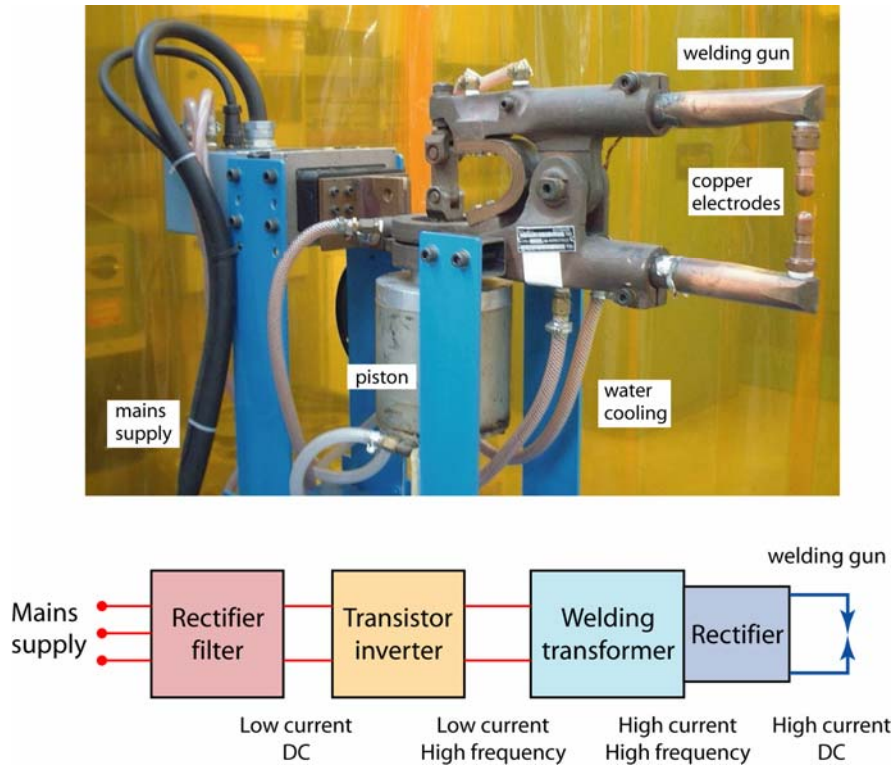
The resistance spot welding machine at TWI used for the experiments and its corresponding schematic.
